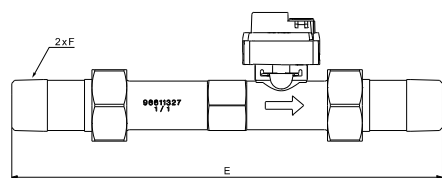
Dimensions, MFS 10-100 l/min, with adapters
